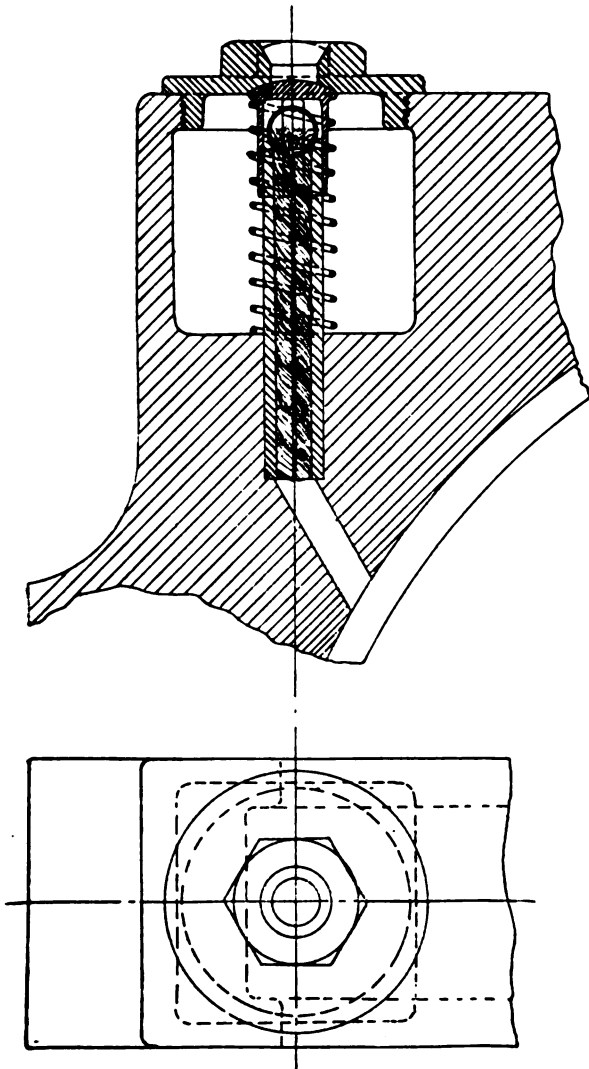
Method of Lubricating Eccentric Straps, and Connecting- and Coupling-rods.
